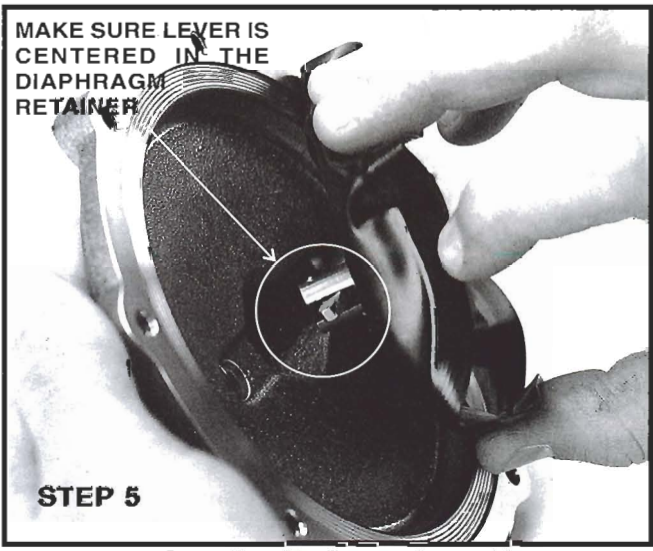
Slide the Diaphragm Assembly onto the Lever.
